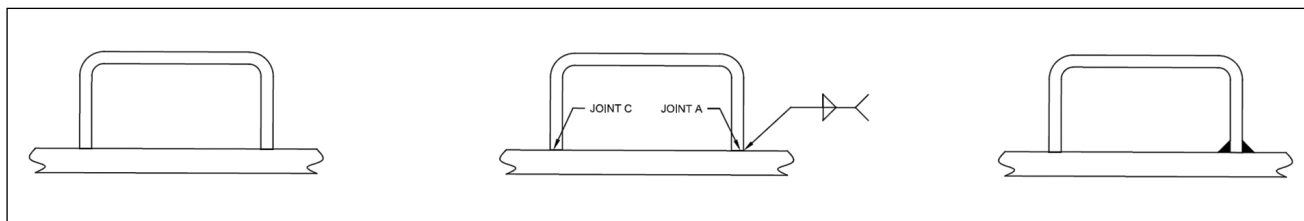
Channel on plate with welding symbol specifying a double fillet weld.
